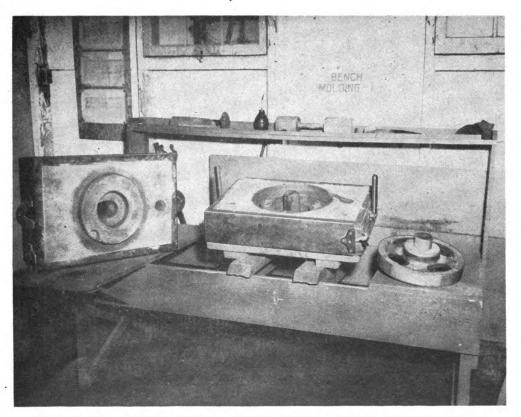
Cope and drag of snap-flask mold using built-up casting as pattern.
